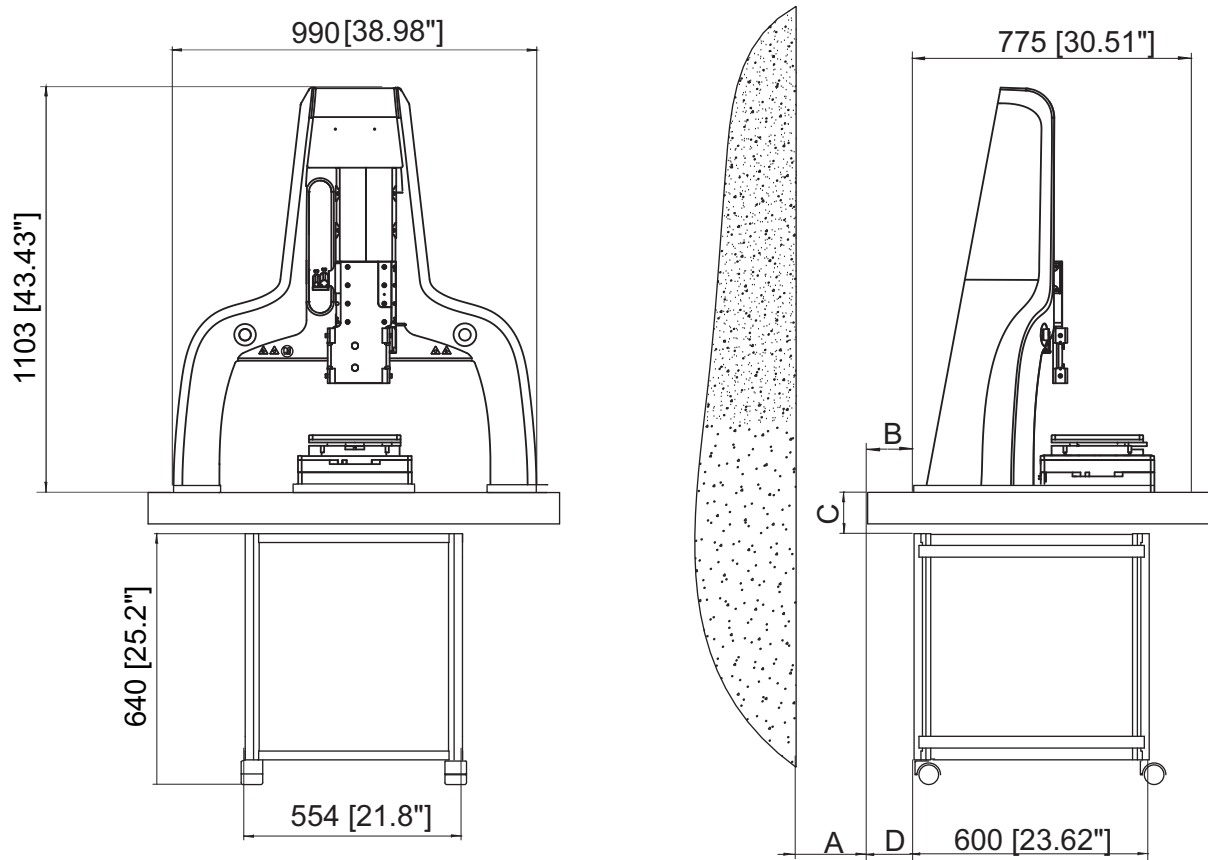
Front and side view of the stand on adapter plates, system cabinet under the breadboard (Dimensions not specified are given in mm.)
